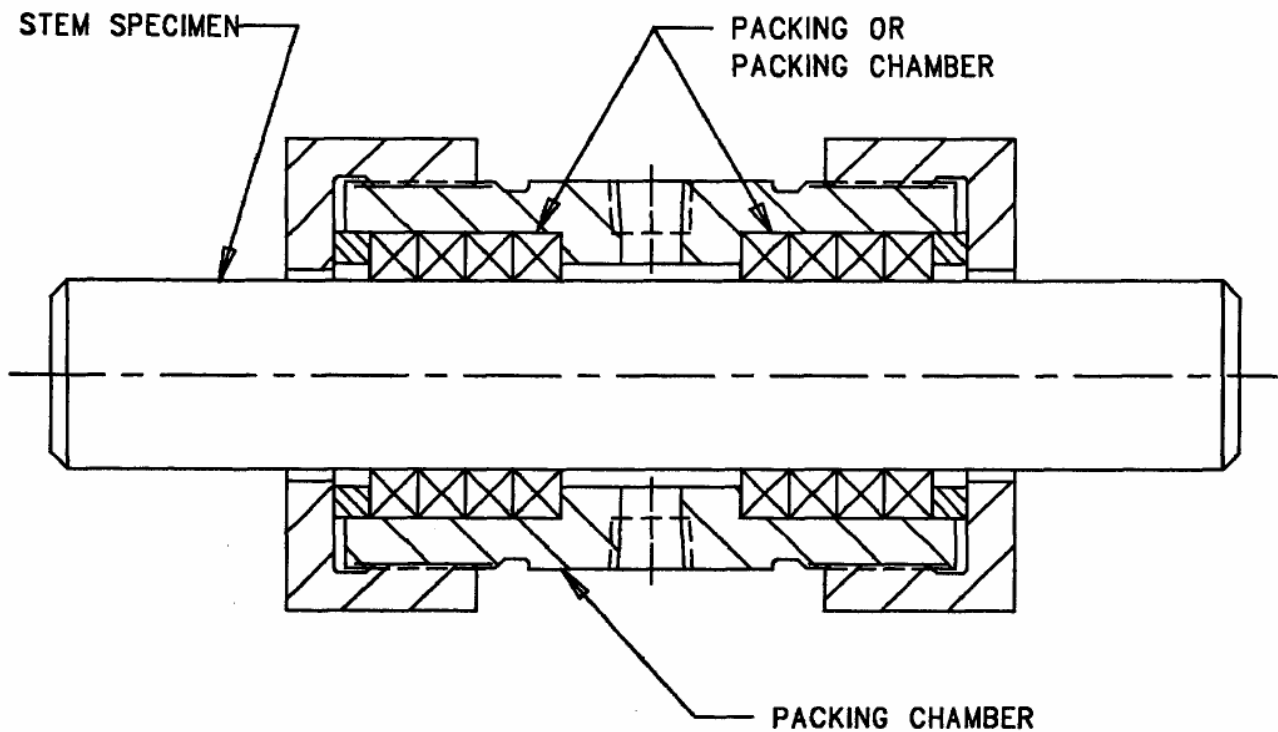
CORROSION TEST FIXTURE^(a)
